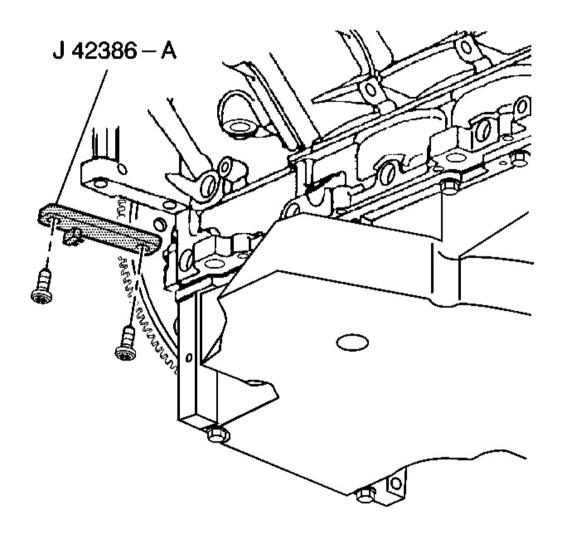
J 42386-A & Engine Flywheel Courtesy of GENERAL MOTORS CORP.
